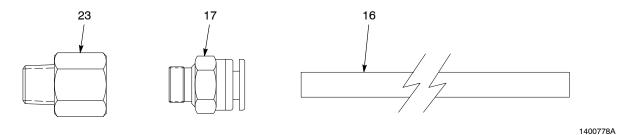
Versa-Spray II Fluidizing Pickup Tube Kit
